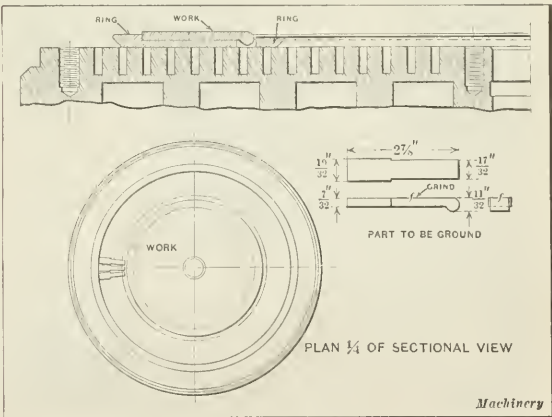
Arrangement of Steel Rings for holding Parts on Magnetic Chuck
